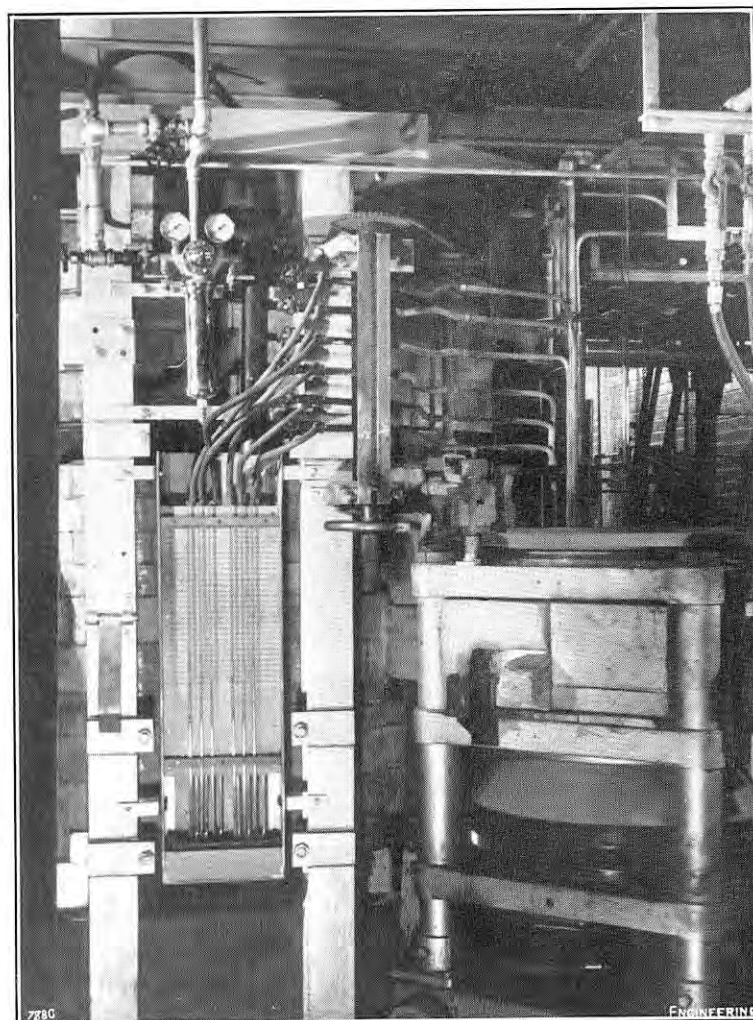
DRAWING MACHINE, SHOWING AIR-PRESSURE REGULATING VALVES AND MANOMETERS.
